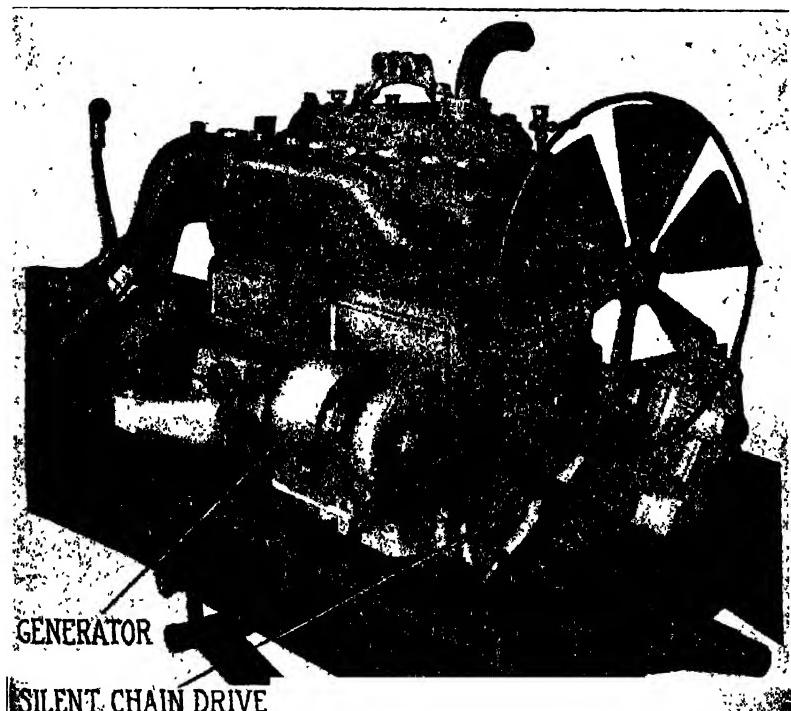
Method of Driving Gray & Davis Generator by Silent Chain from Engine Crankshaft.
